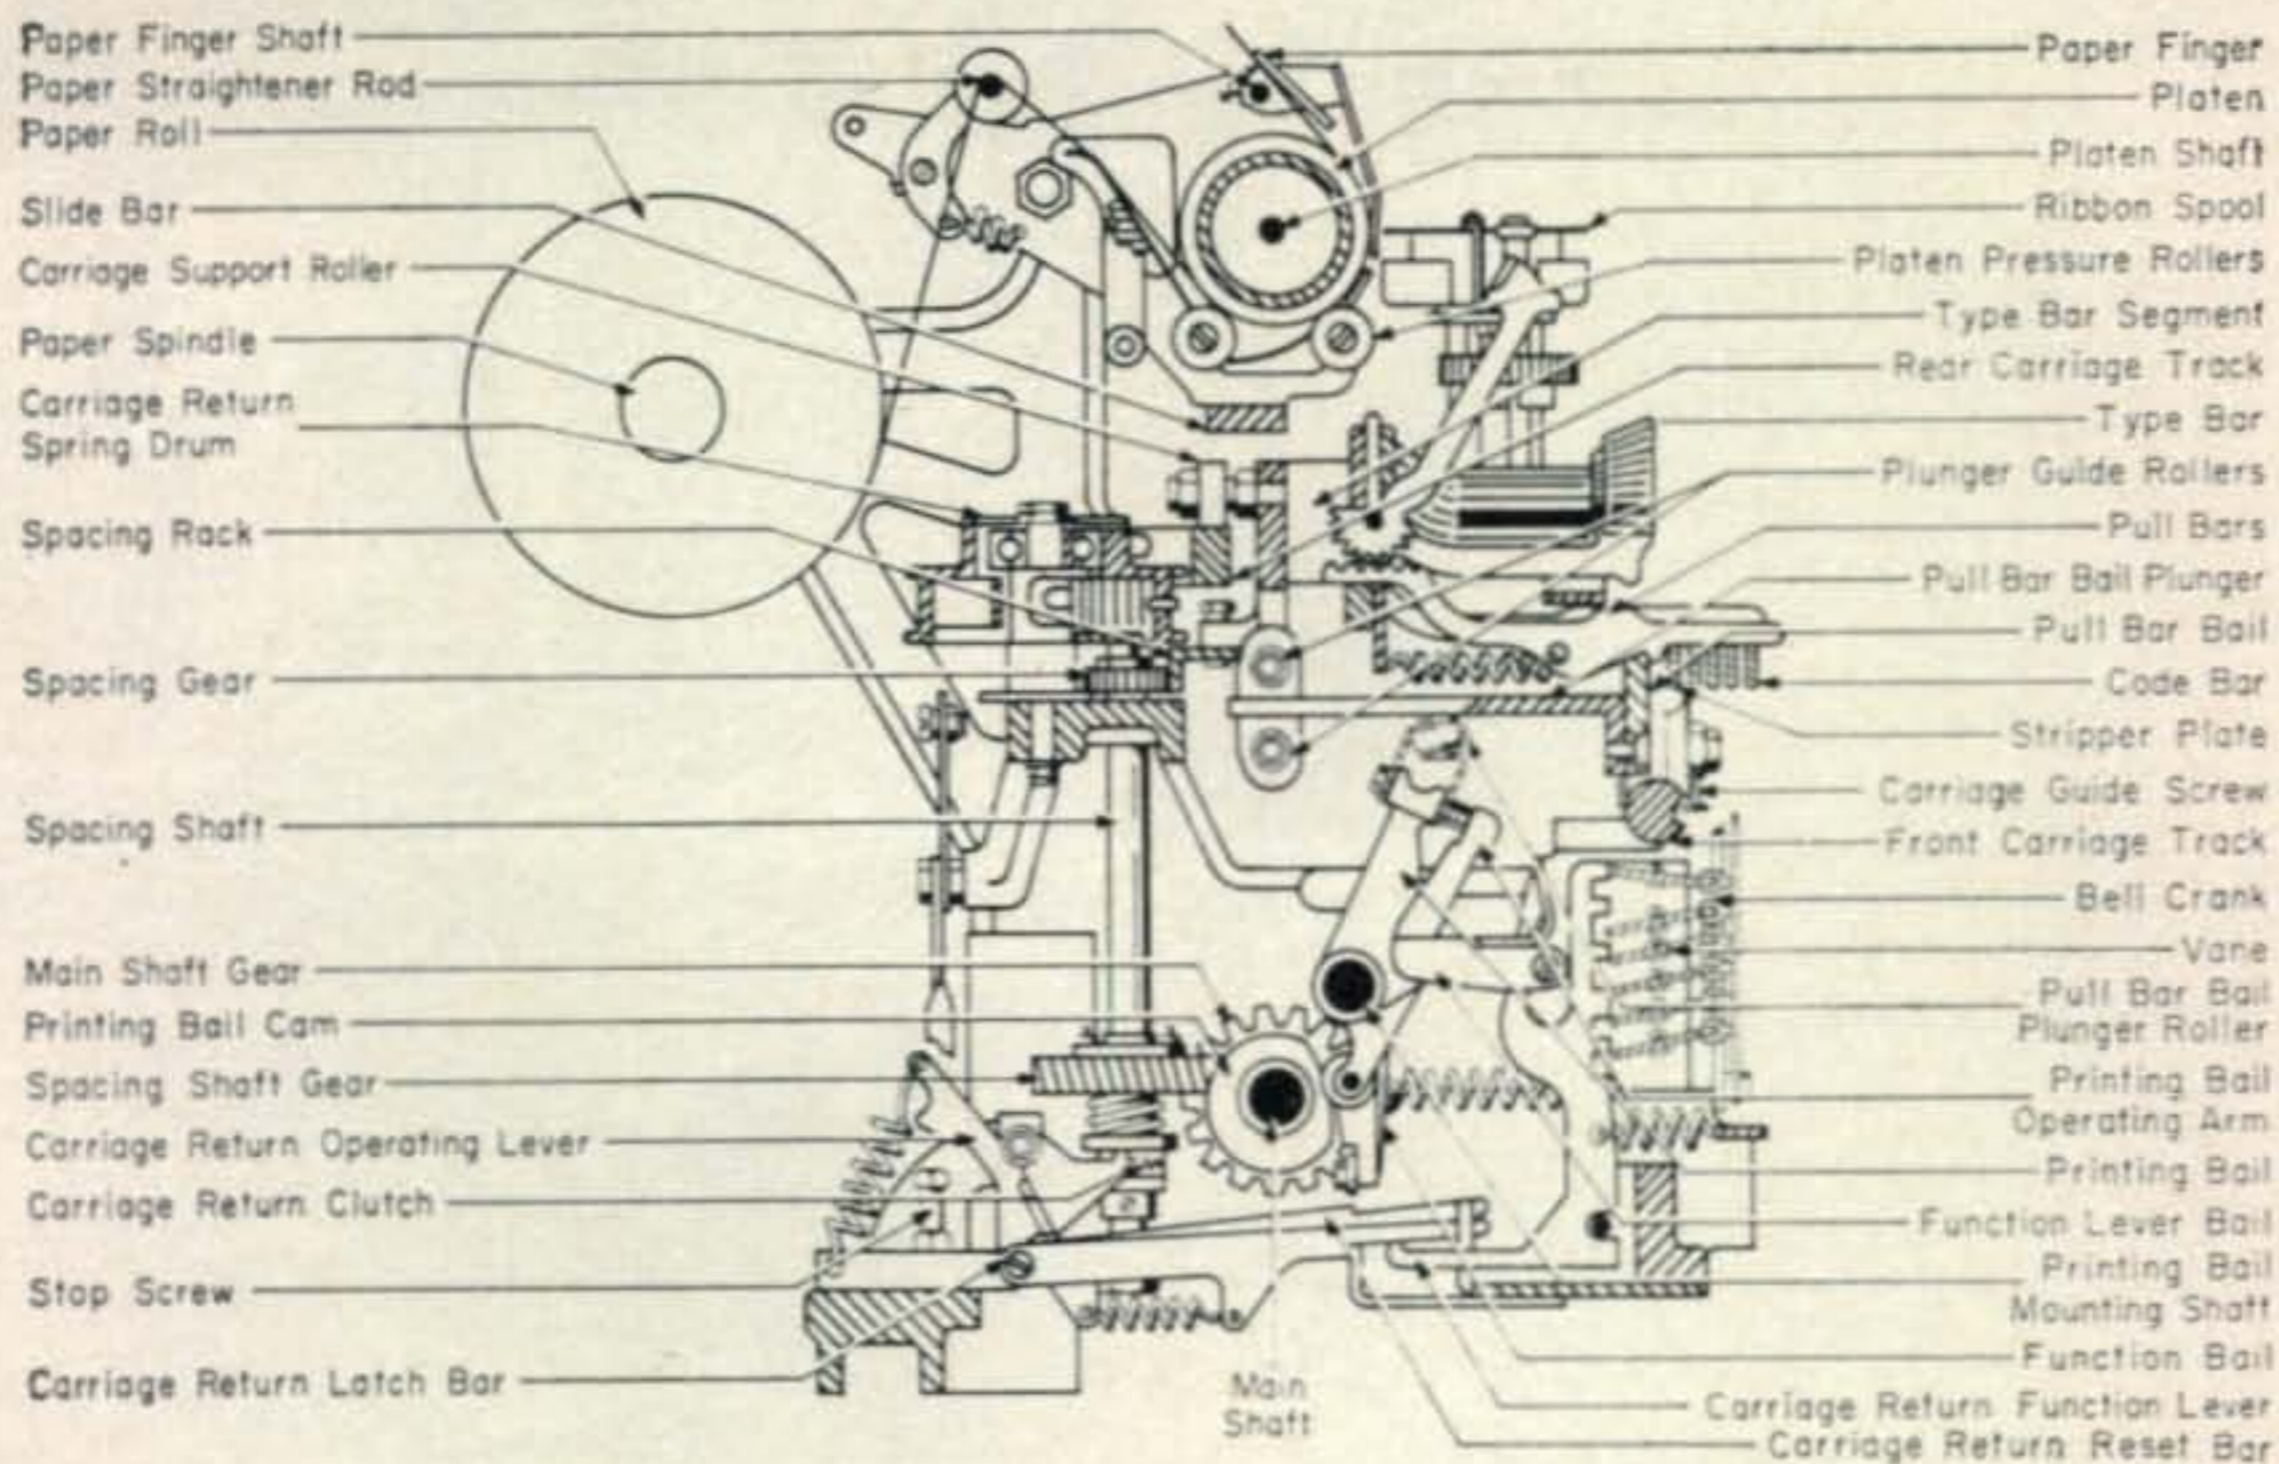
End view of the typing unit showing the location and identity of many parts.
